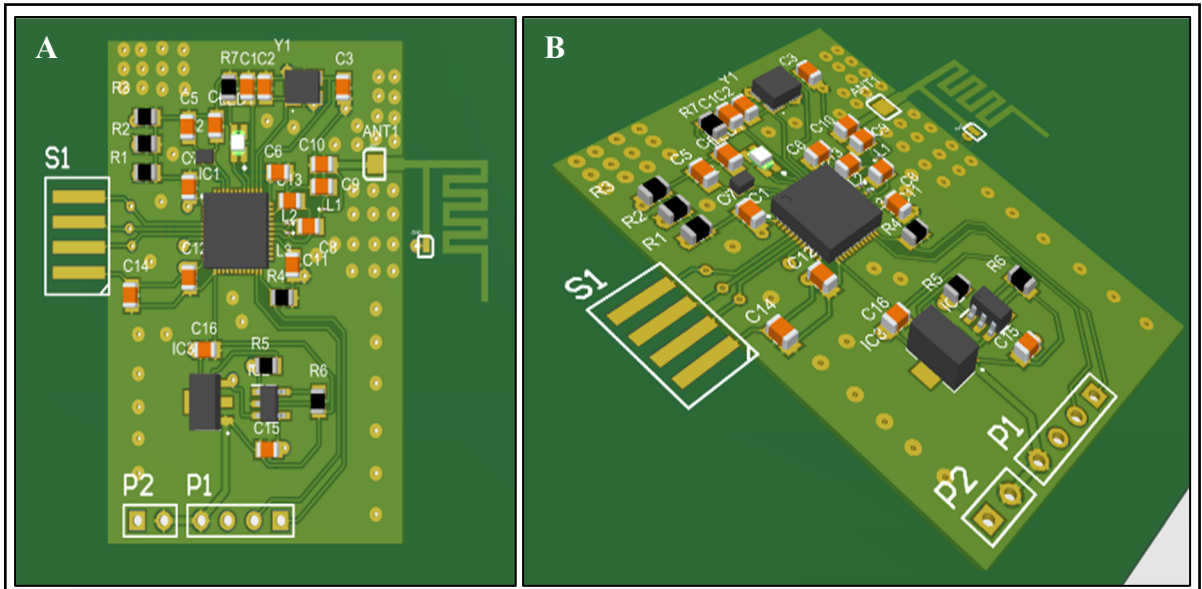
Layout design of flexible WWD: (A) 2D layout, (B) 3D layout
